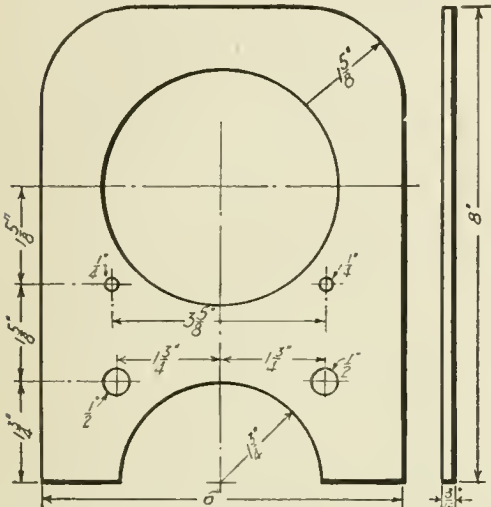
Dimensions of the upright which serves to carry the light-shield
